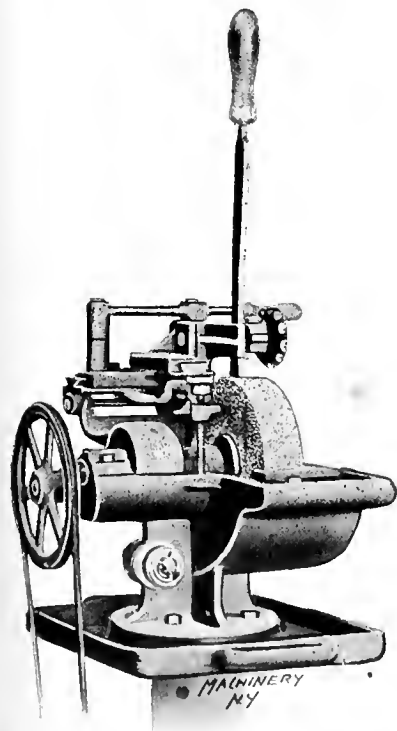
Revolving Oilstone sharpening Machine Scraper.
